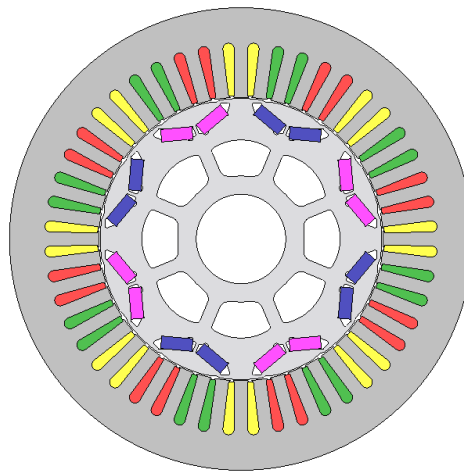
Cross-section of the Toyota Prius 2010 machine.
